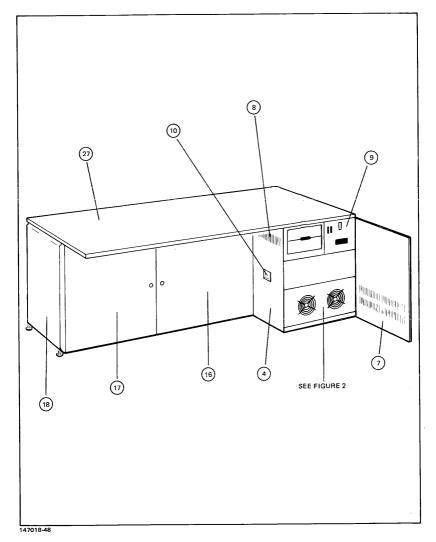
HP 3000 Series 33 Front View (Sheet 1 of 3)
